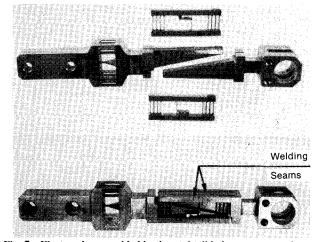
Electron beam welded horizontal tail balance; parts and ready welded balance body.
